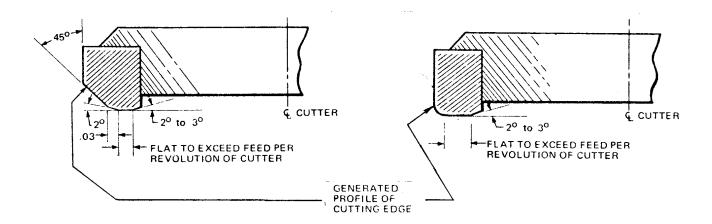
Cutting Profile for Fine Finish in Face Milling
